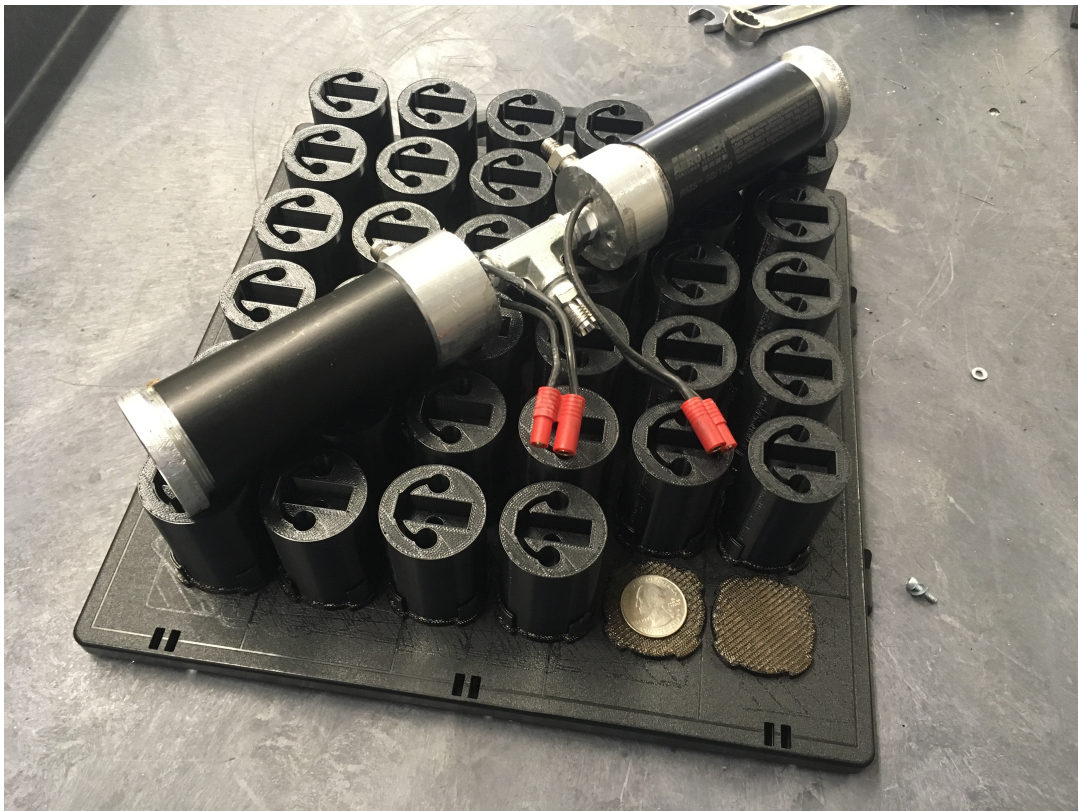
Thruster Assembly on Tray of 36-3D Printed ABS Fuel Grains
